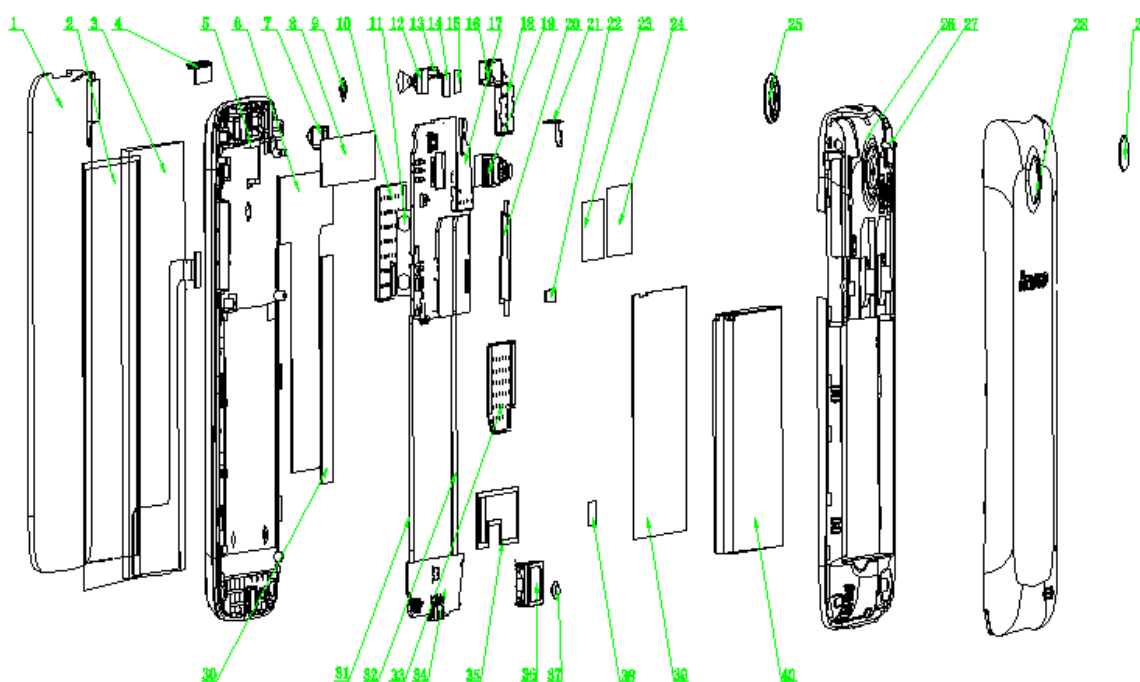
Exploded View of LENOVO A516 Main body Part Assembly
